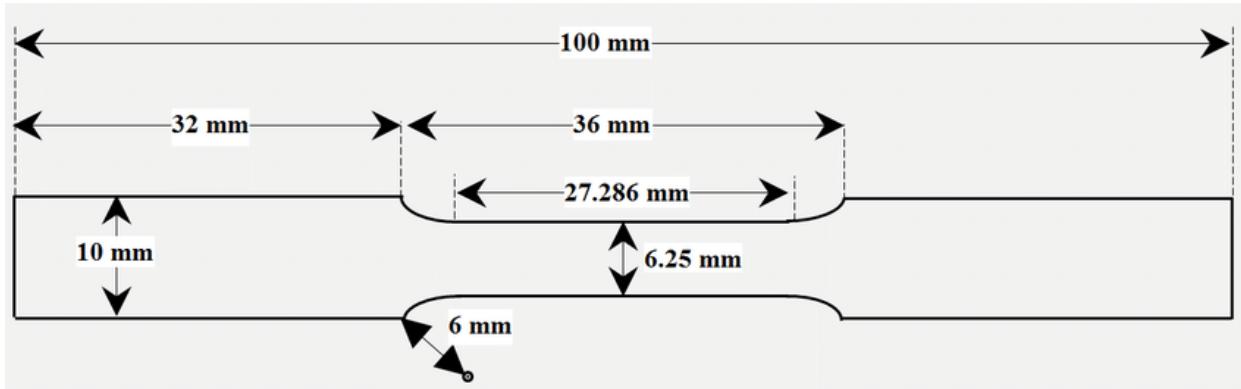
Specimen showing ASTM E8 standard dimensions.
